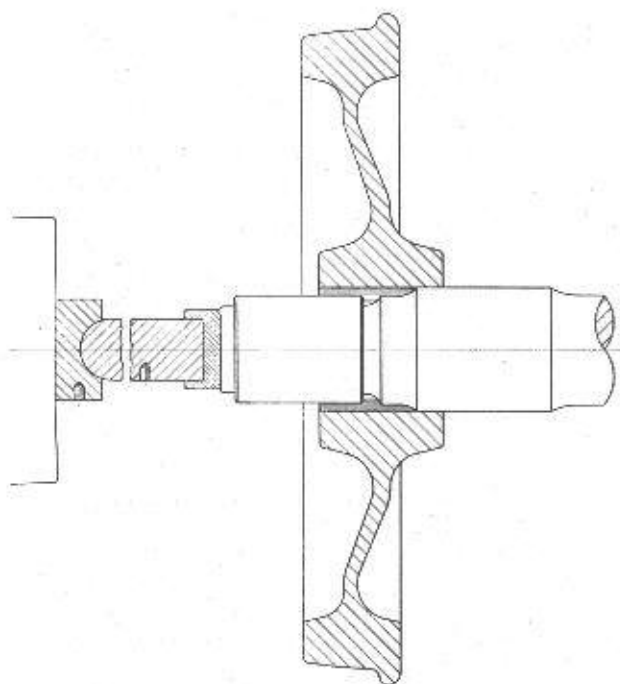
C. Wheel partly pressed off the axle. Note that the bearing inner race is not disturbed. Note also the design of the self-aligning cap and block shown in the section under the press ram.
